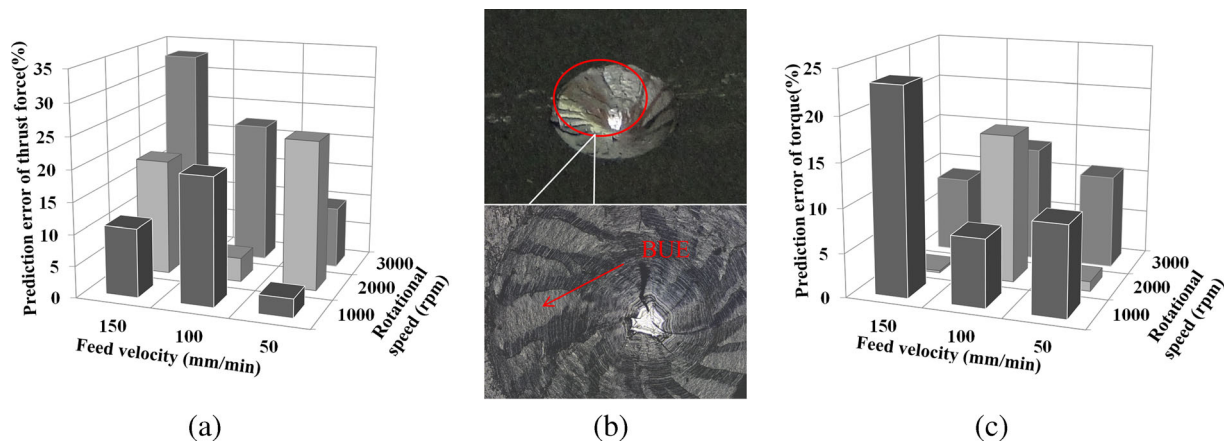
Prediction error of thrust force and torque. a Thrust force. b BUE residue squeezed on the transition surface. c Torque
